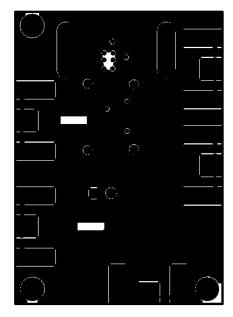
MAX3724/MAX3725 EV Kit PC Board Layout—Solder Side
